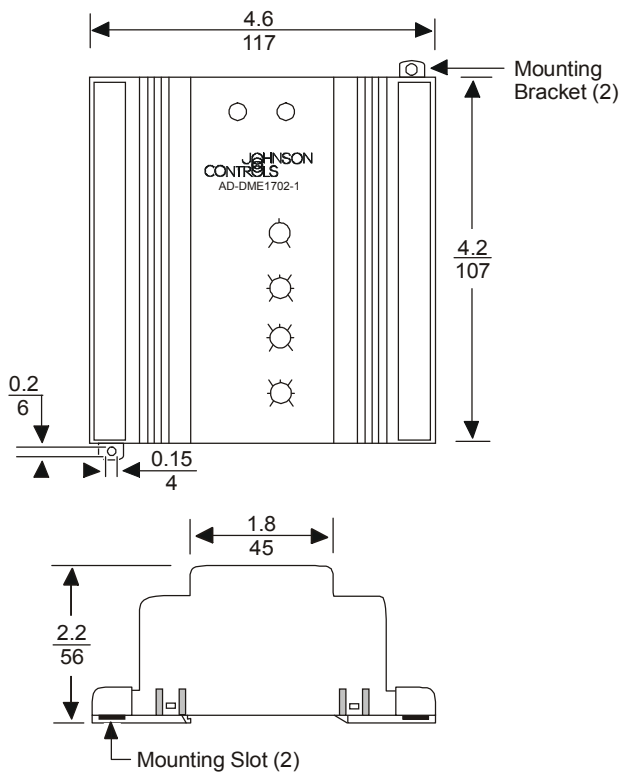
AD-DME1702-1 Dimensions, in. (mm)
